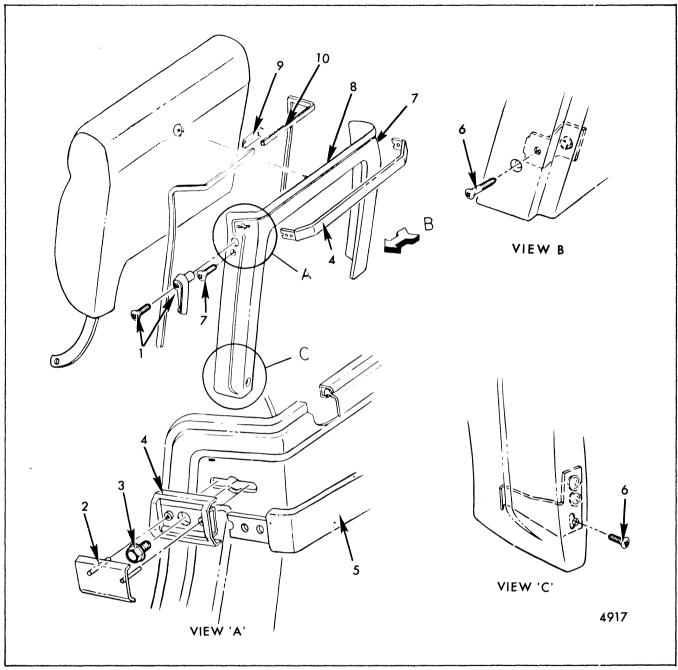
Front Seat Back Assist Strap and Panel Assembly - Cadillac Two-Door Styles
